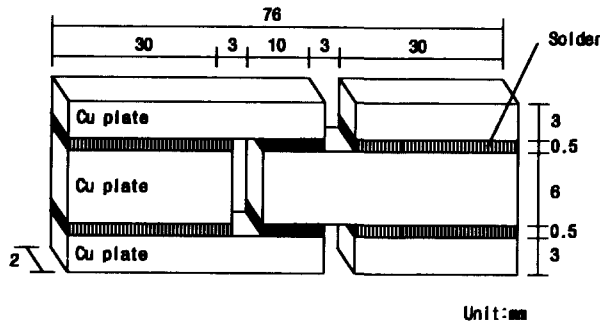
Shape of modified double lap shear joint specimen to test the strength of solder joint.
